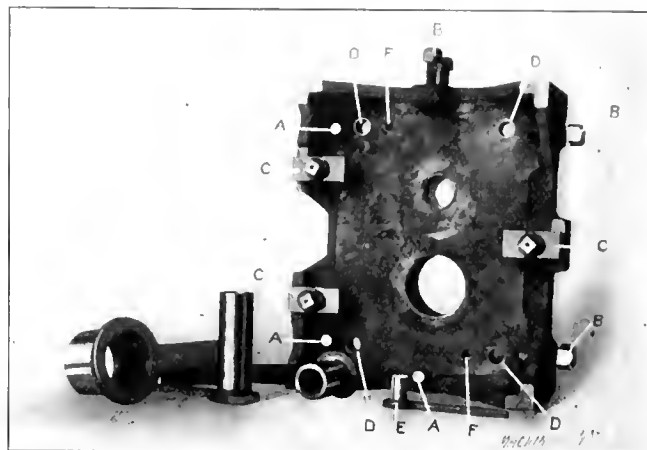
Example of Open Drill Jig. View showing Front Side.
